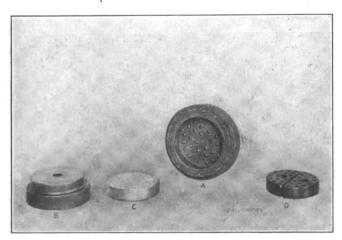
Tools for Laying Out Holes in Jaws F, Fig. 1
